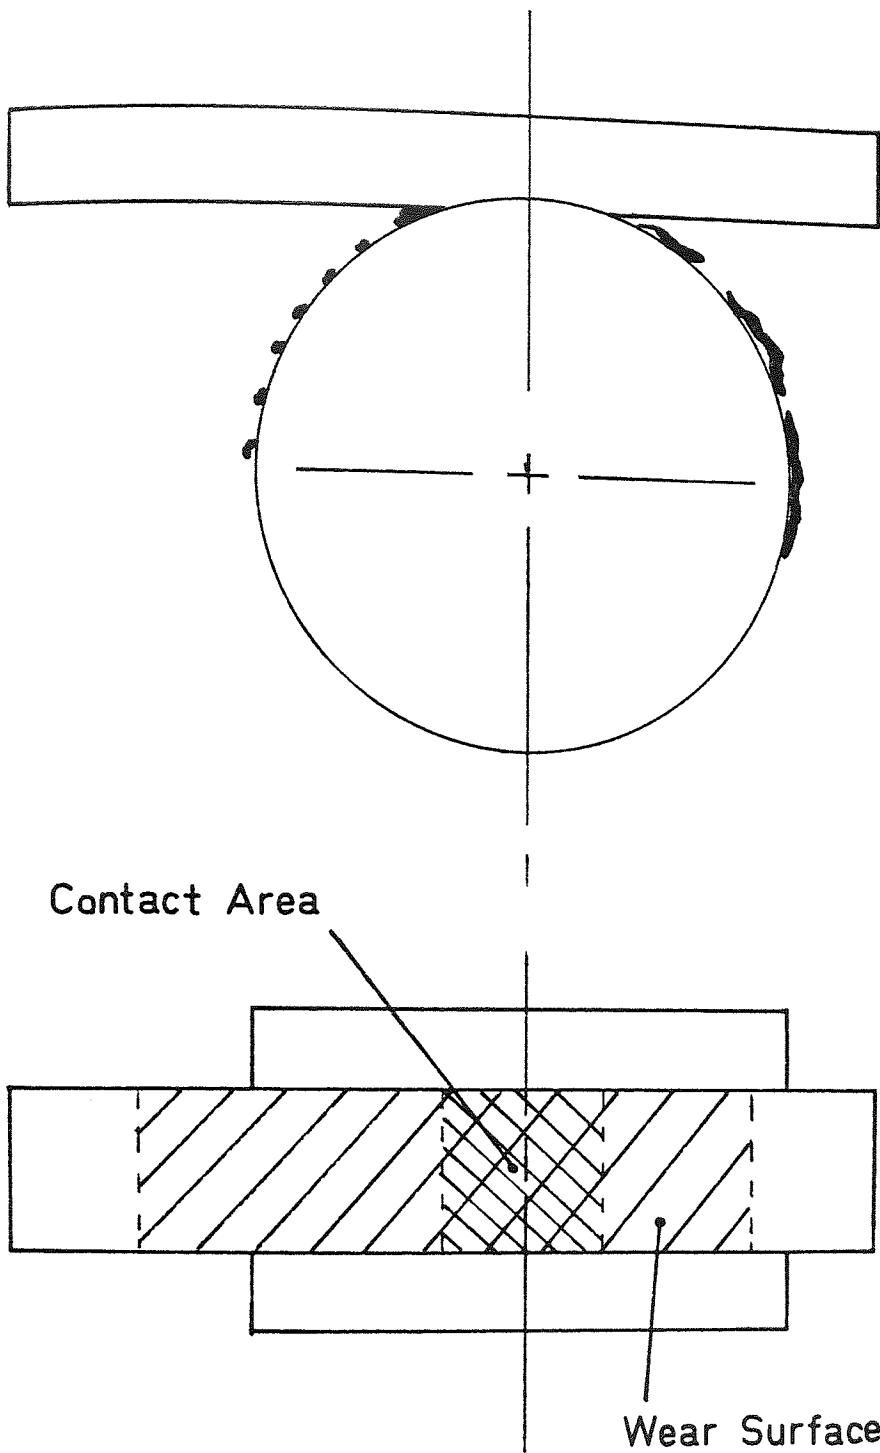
Debris formation on the Reciprocating Line Contact machine
